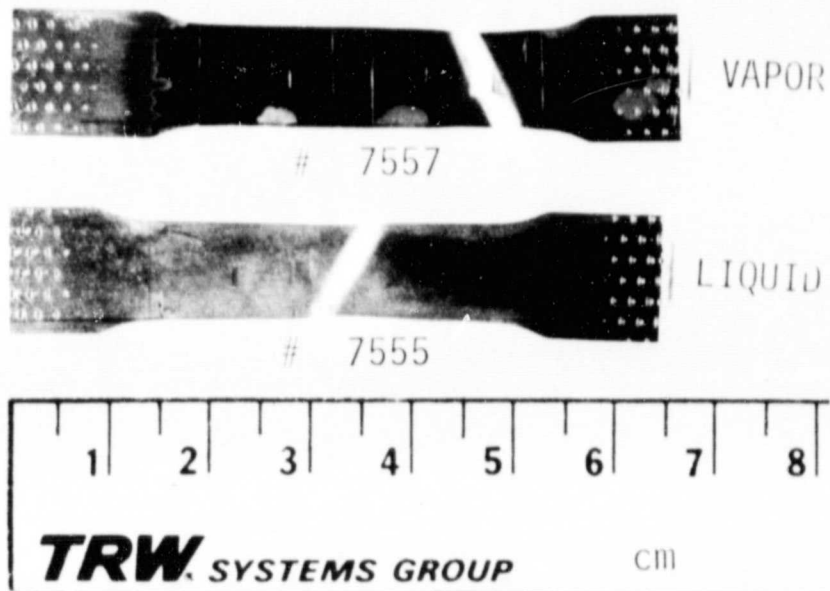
Photographs of Fractured Tensile Coupons, (continued) Post-Immersion 29-Month Tests, 298 K.
